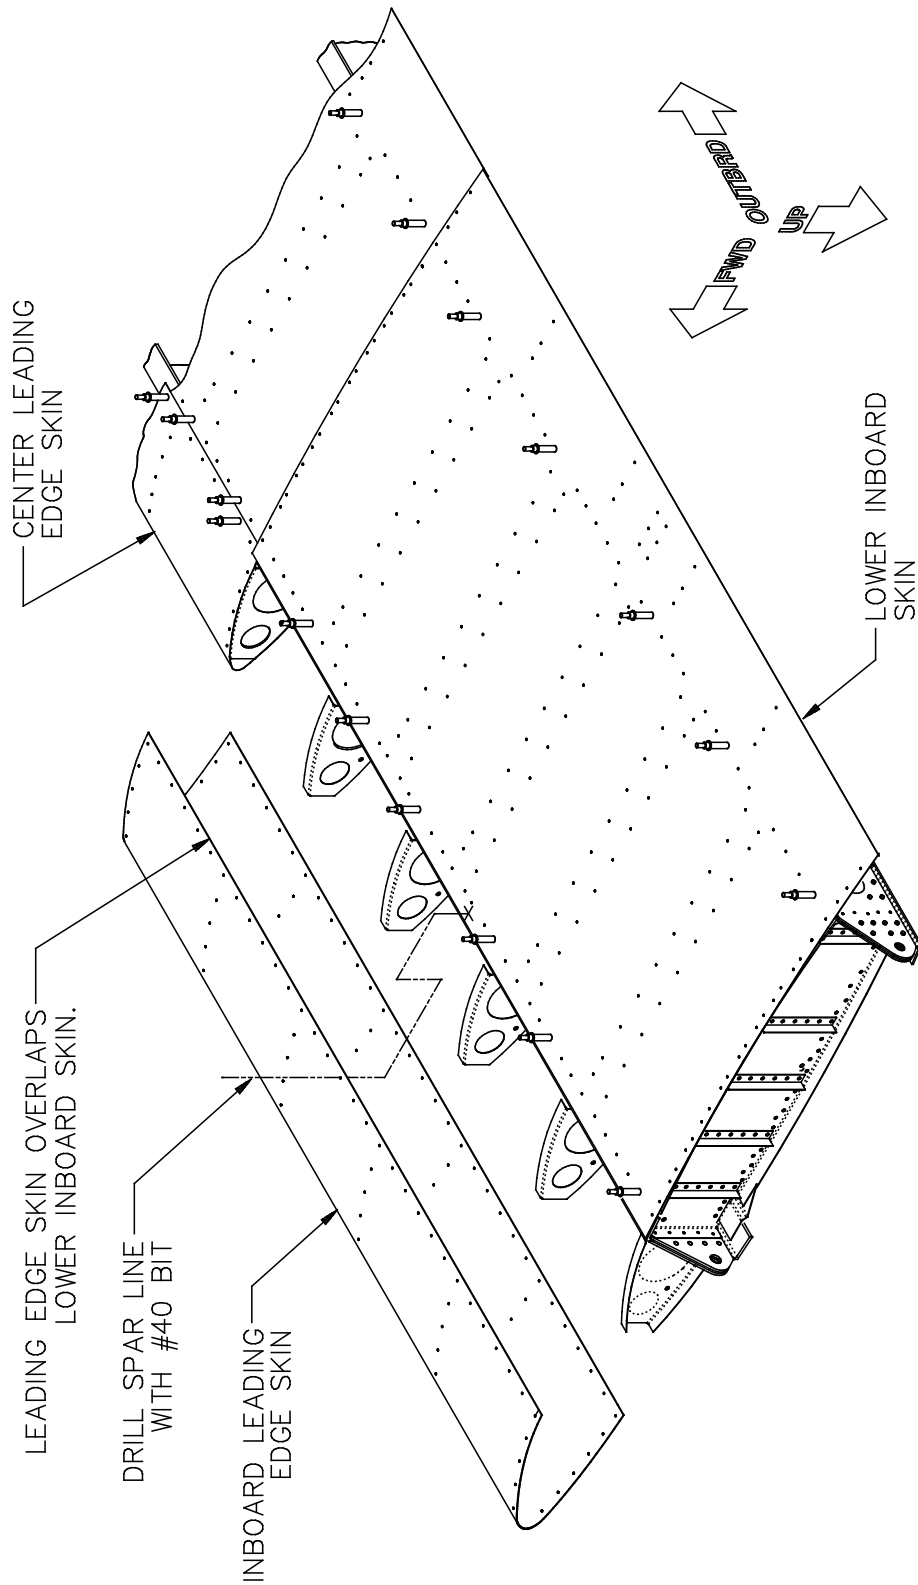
Fitting the Leading Edge Skin over the Lower Inboard Skin
